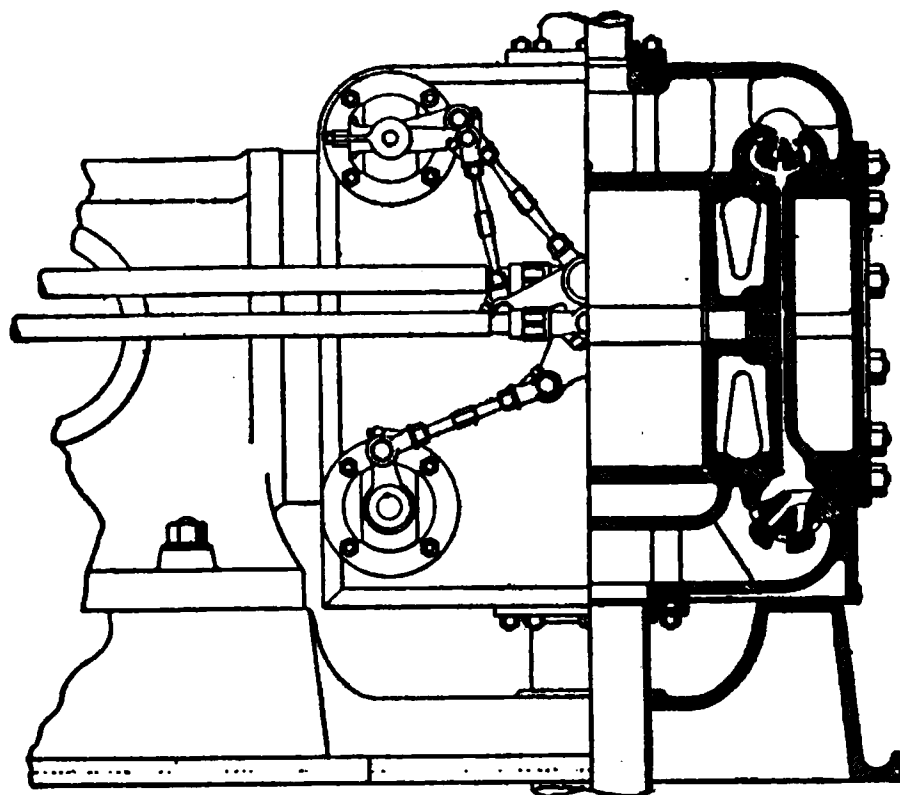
,069.—The Clark four valve riding cut off engine; there are in reality six valves, each steam valve consisting of a main admission valve, and a cut off valve. A fixed eccentric operates the main and exhaust valves, and a movable (rotating) eccentric (giving *variable angular advance*), the riding valves, the cut off being controlled by a shaft governor.
